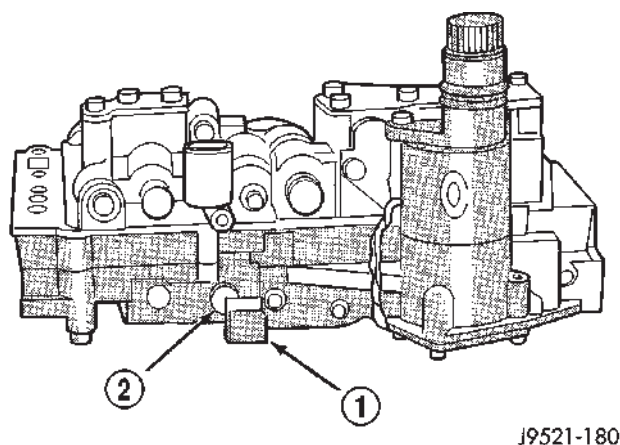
Seating 3-4 Accumulator On Lower Housing
